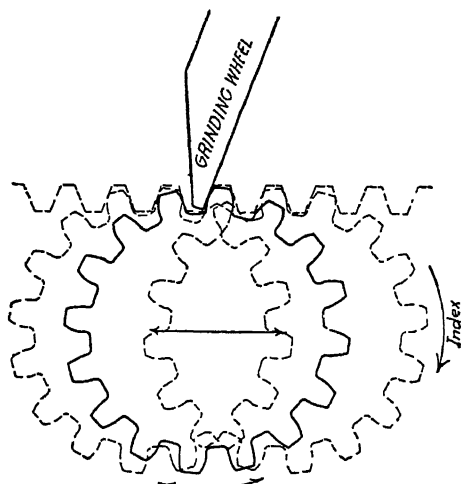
Grinding Gear Teeth by the Generating Principle.
